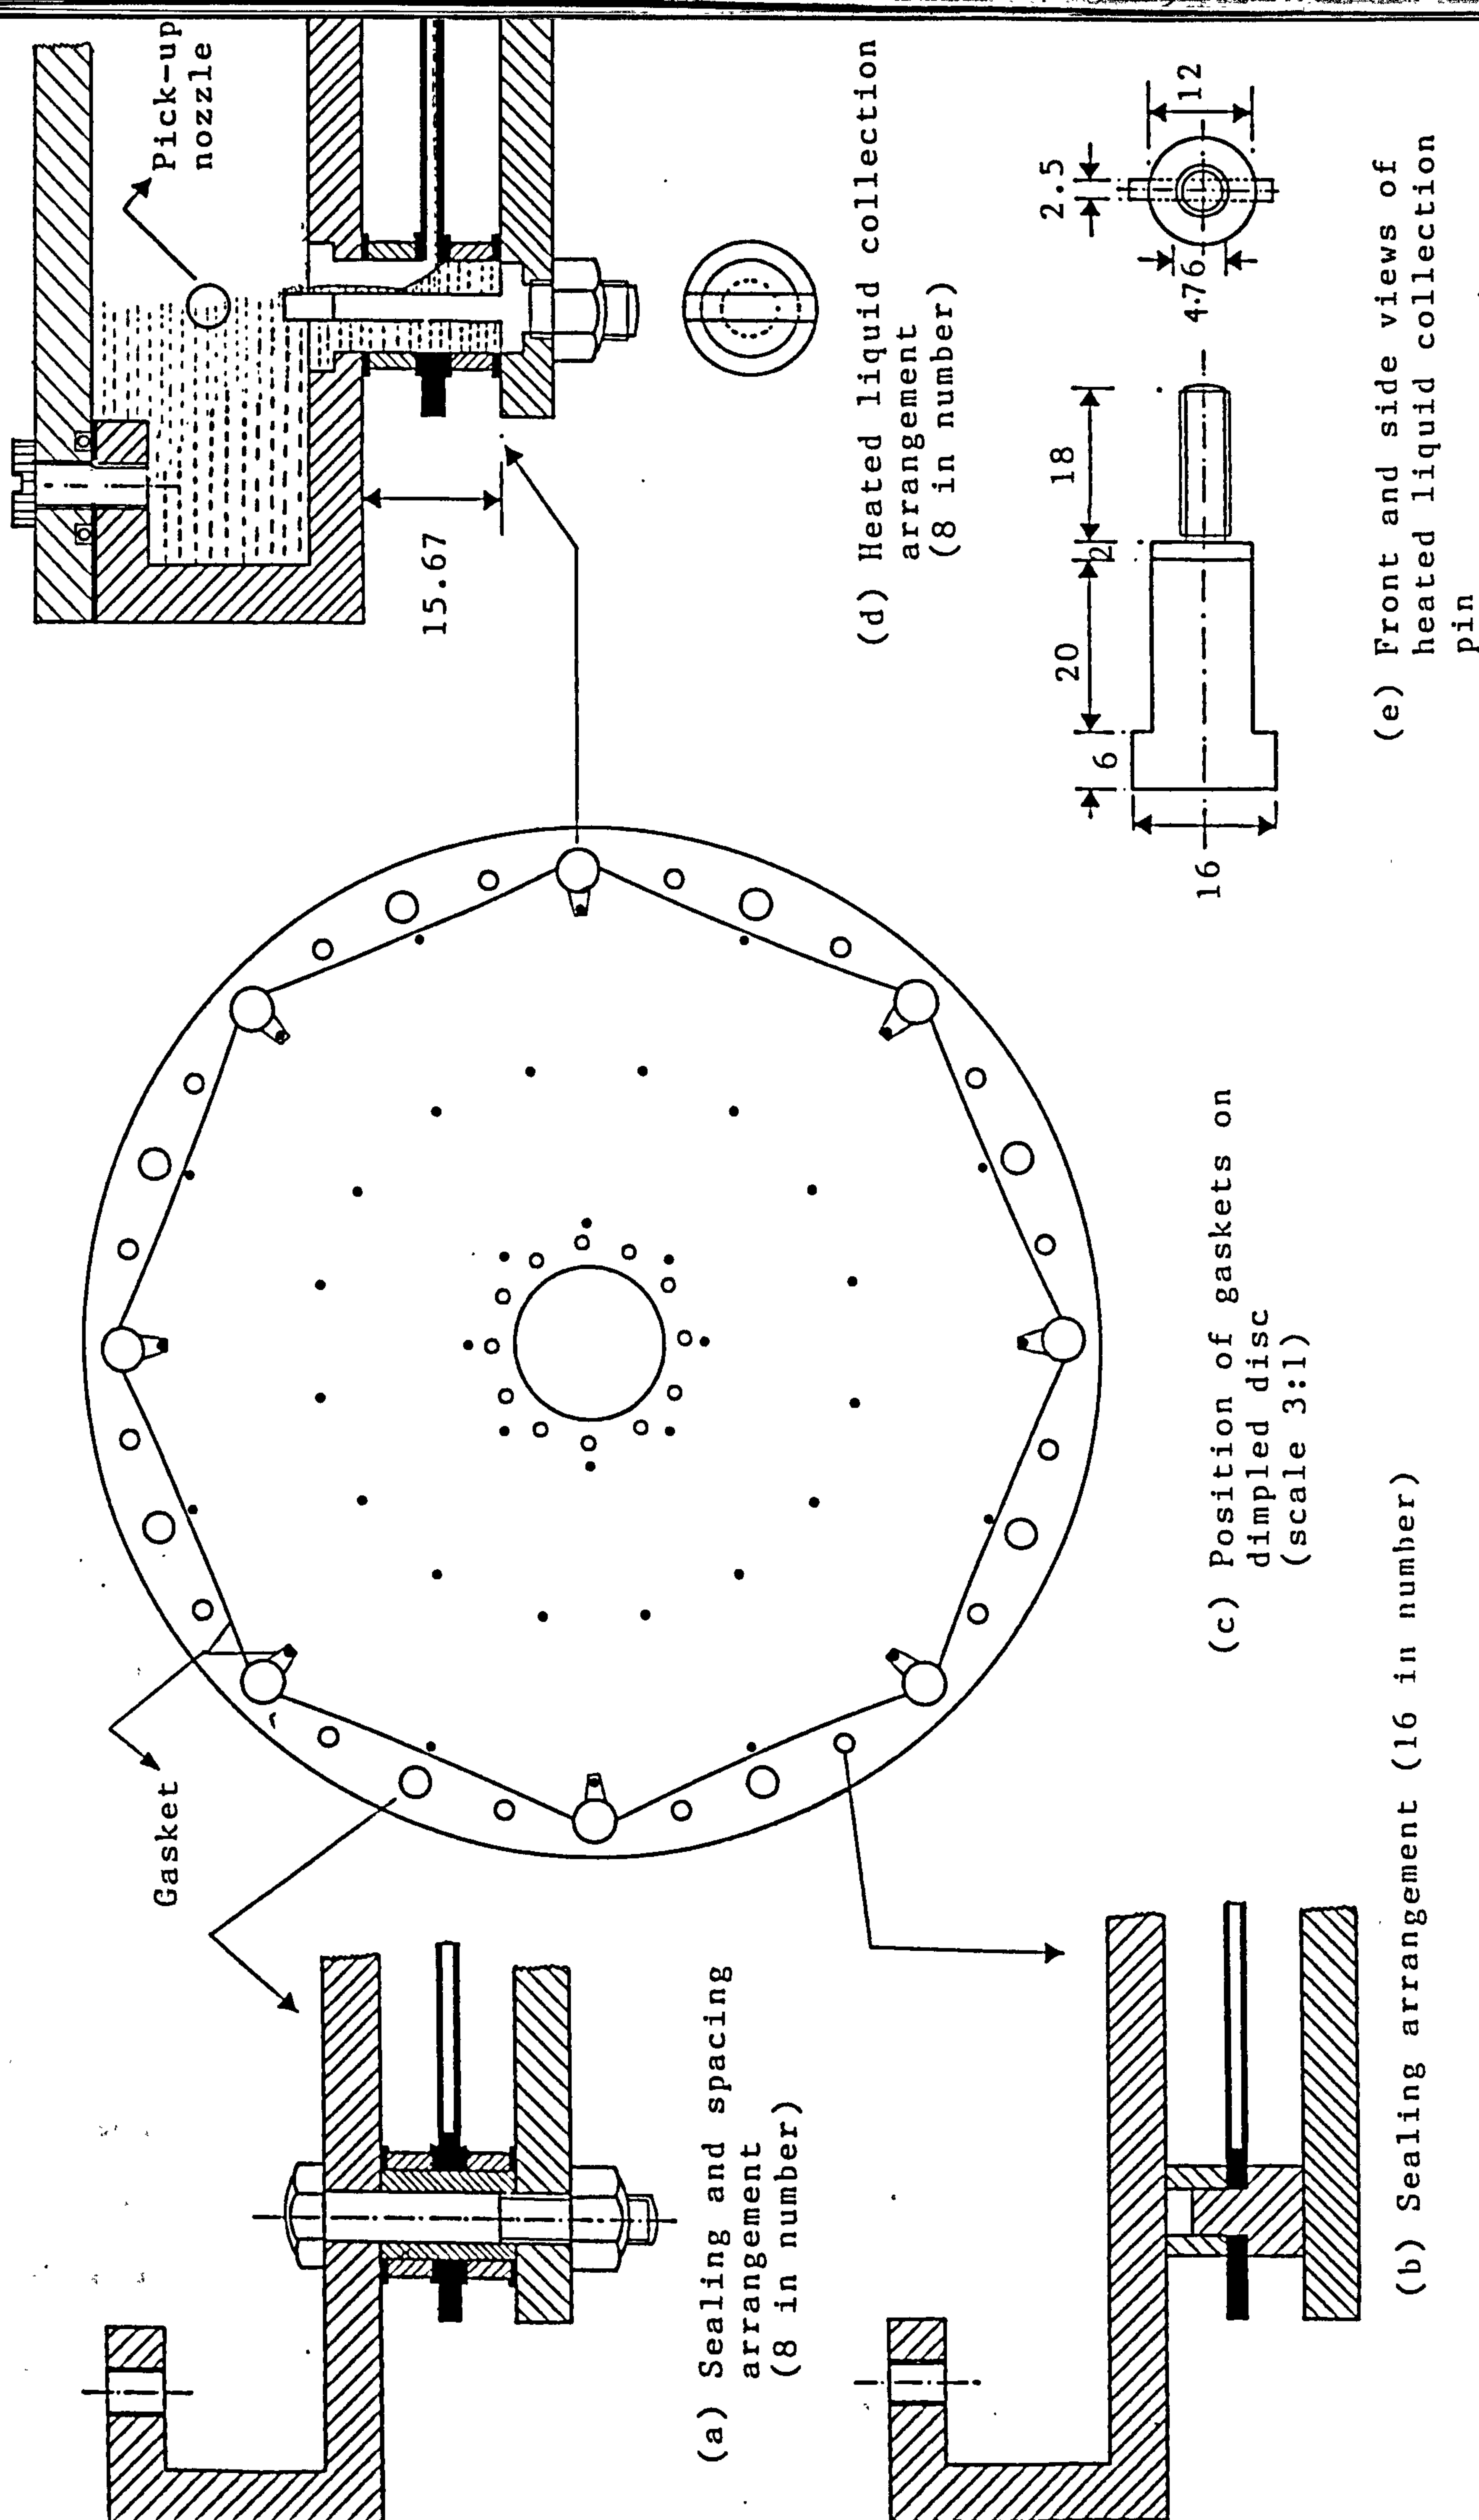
VARIOUS SEGMENTS OF THE DISC ASSEMBLY (Full scale; All dimensions are in mm)
